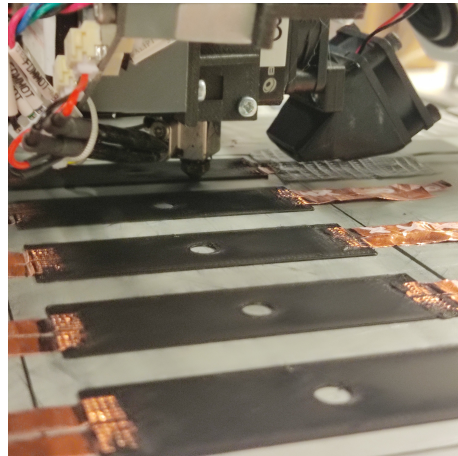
Resuming printing on polymer samples after the copper tapes have been mounted and soldered.
